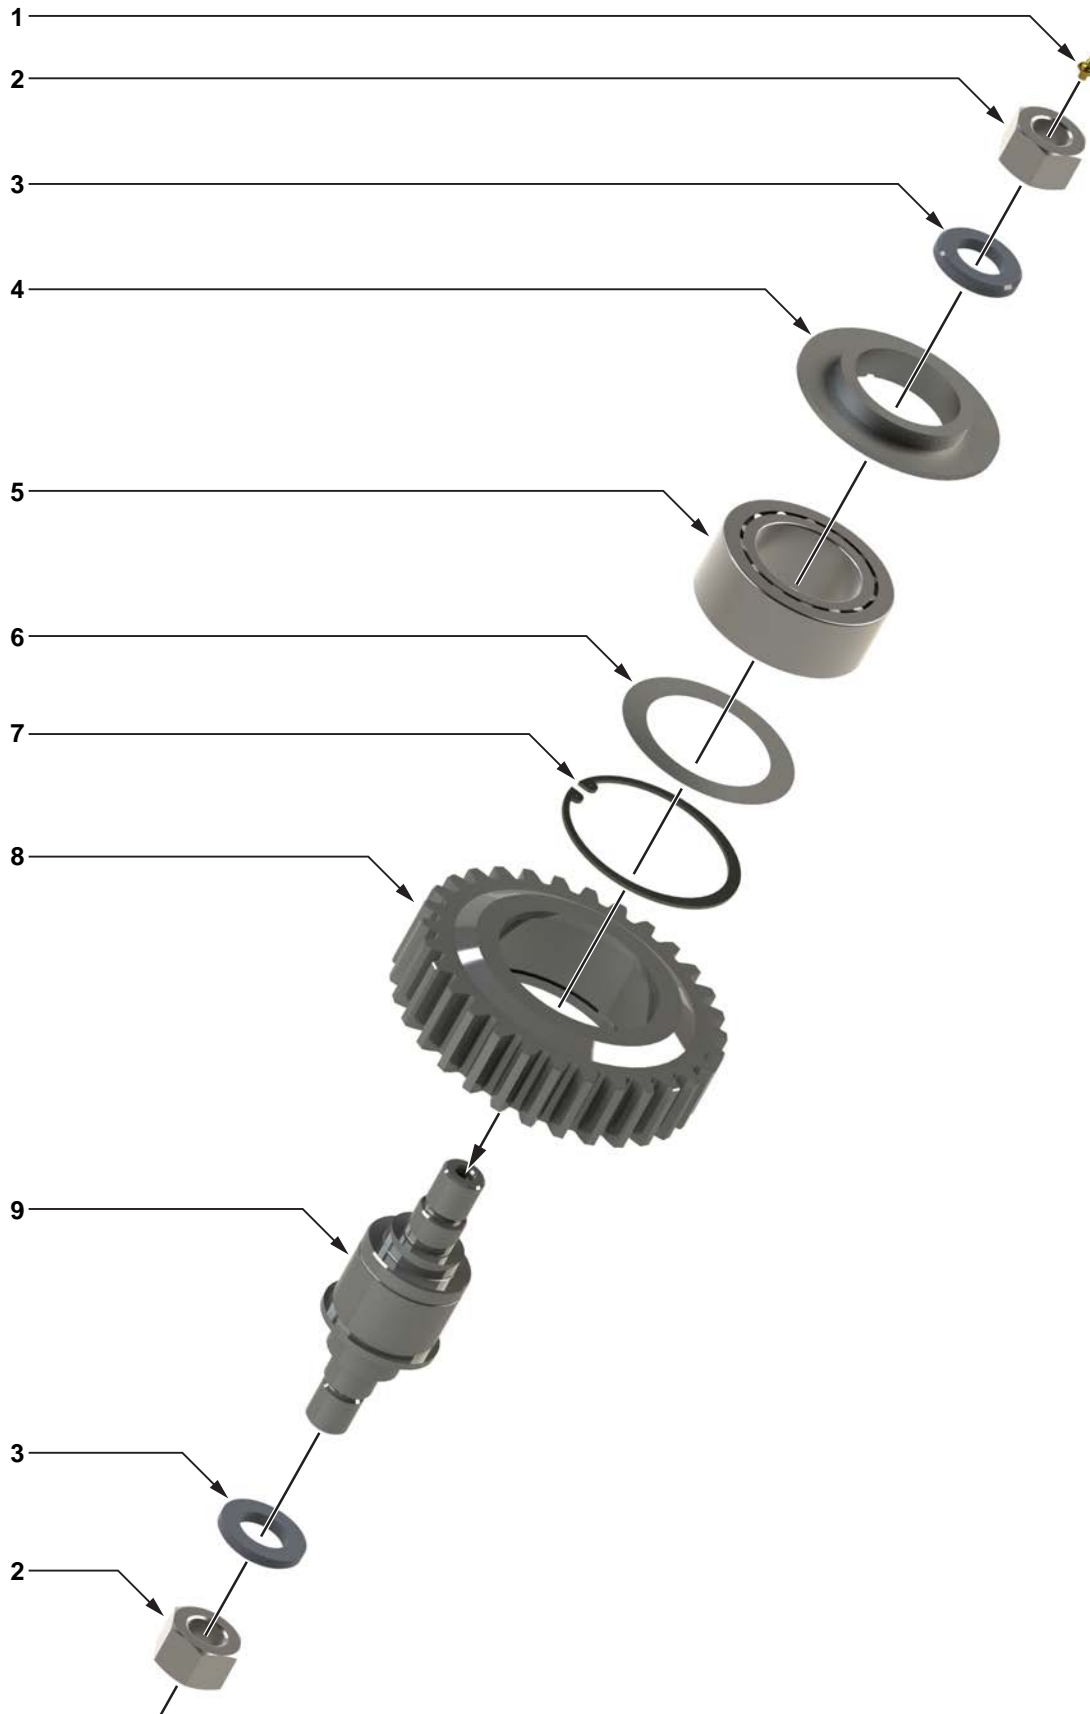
101-3496 HD31-80K Rotary Idler Exploded
